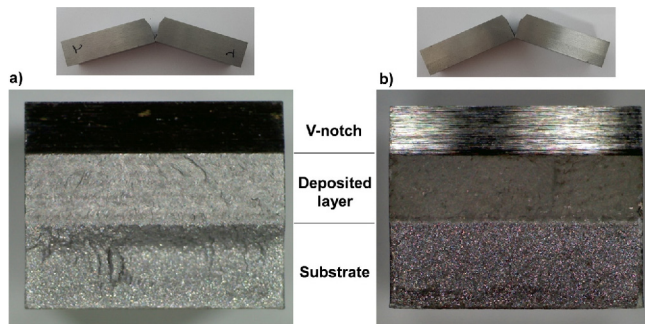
Fractured specimens after Charpy test: (a) deposited H13 and (b) deposited M2.
